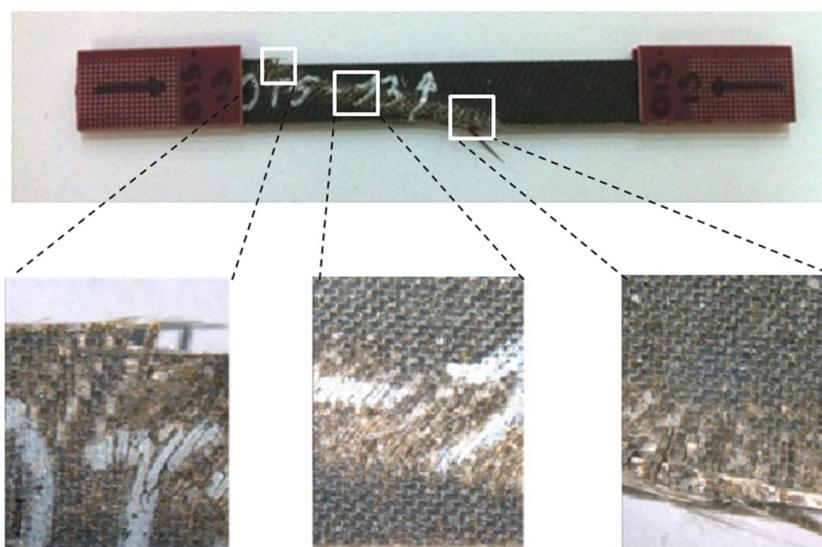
Fractured specimen with twill weave 1/3 fabric reinforcement in the fill direction. The areas enclosed in the square boxes show details of the damage mechanism leading to sample failure.
